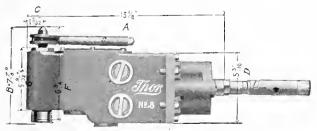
Thor Close Quarter Piston Air Drill, No. 8. Made in 2 Sizes. Independent Pneumatic Tool Co.
